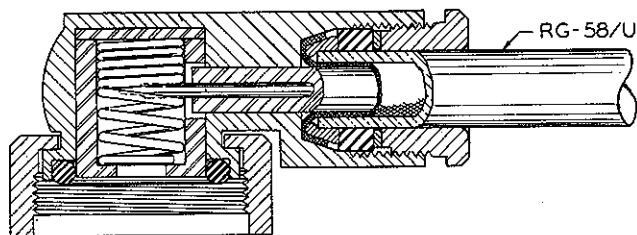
Connector, Plug (D-C Plug P-101)
